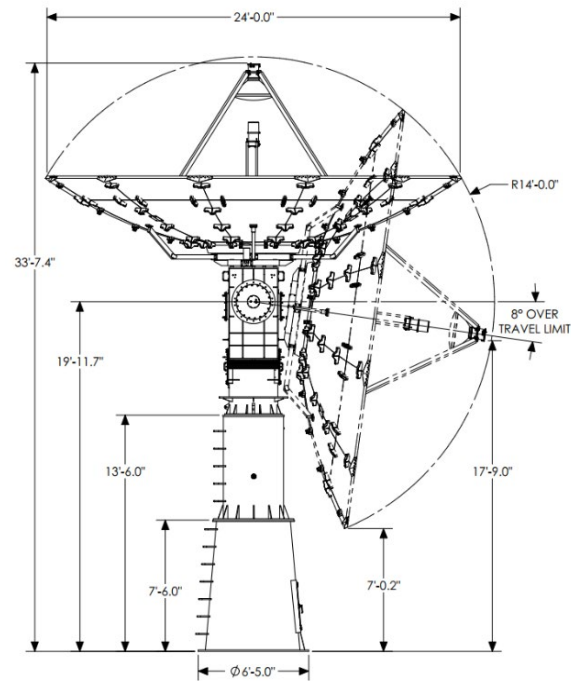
Model 6000-7.3M Drawing w/ Custom Riser Extension
